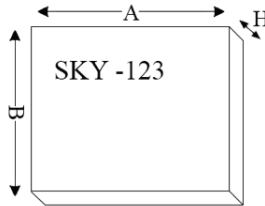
Product geometry support. Package size: $A \times B$; Mold Cap: H .
